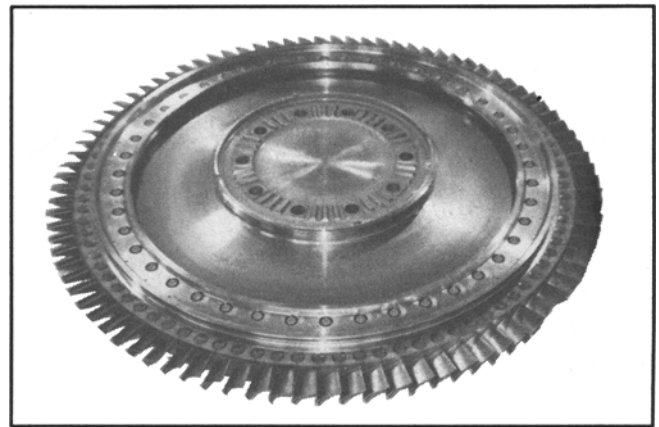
Solar Mars T-14000 first stage turbine assembly. CMSX-4 blades.
